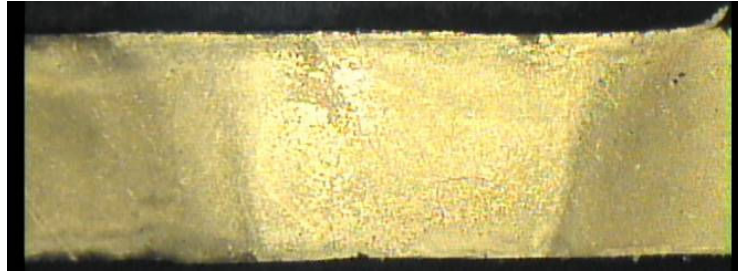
Weld using  $\frac{1}{4}$  inch threaded tool and force control via traverse speed.
